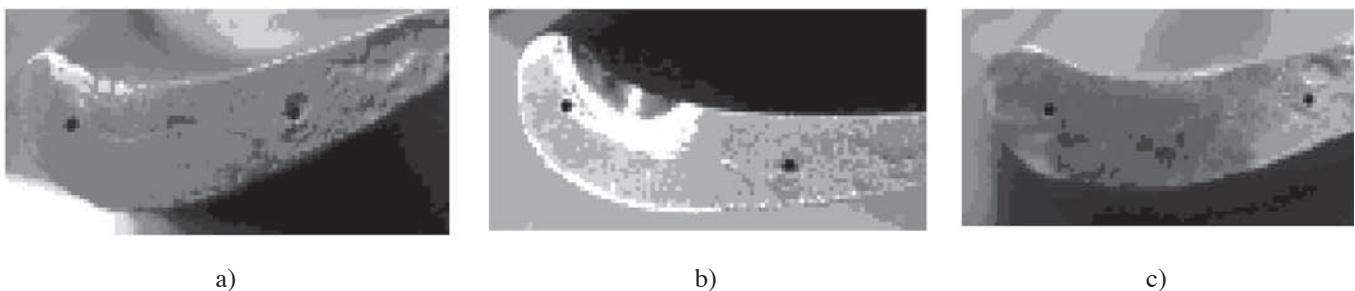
Repair of single-crystal turbine blade by ESD, showing a) as-received blade with thermal fatigue cracks, b) cracks removed by grinding, c) restored by ESD using original material as filler and finished.
